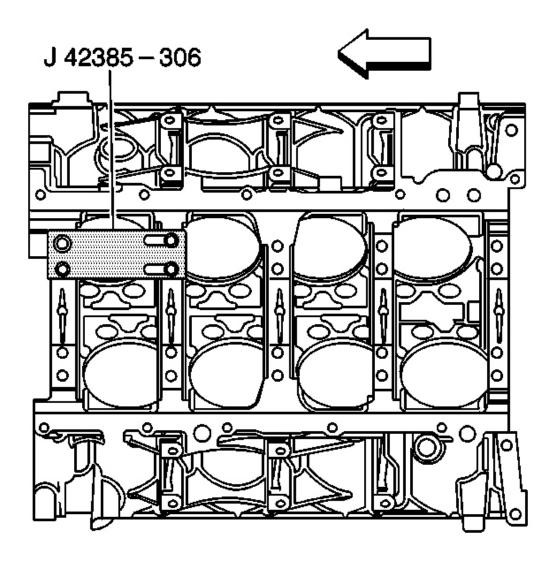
View Of Fixture Plate, Bolt & Bushing Courtesy of GENERAL MOTORS CORP.
